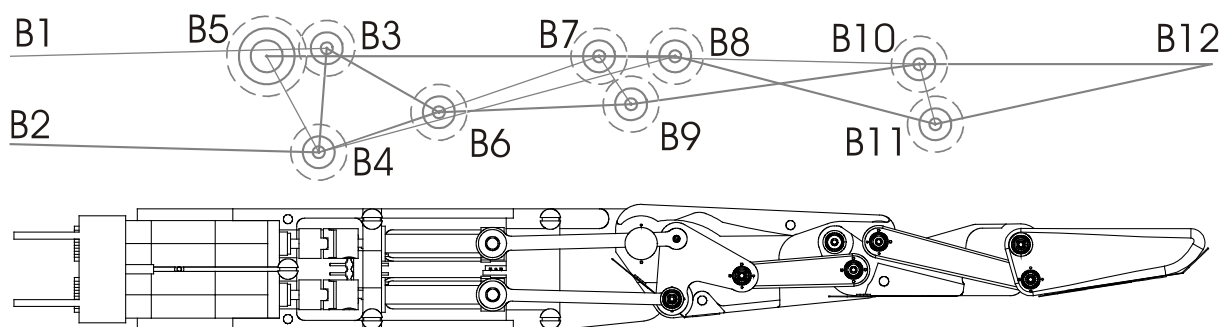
Index Mini Motor Finger Linkage Geometry and Model Design
